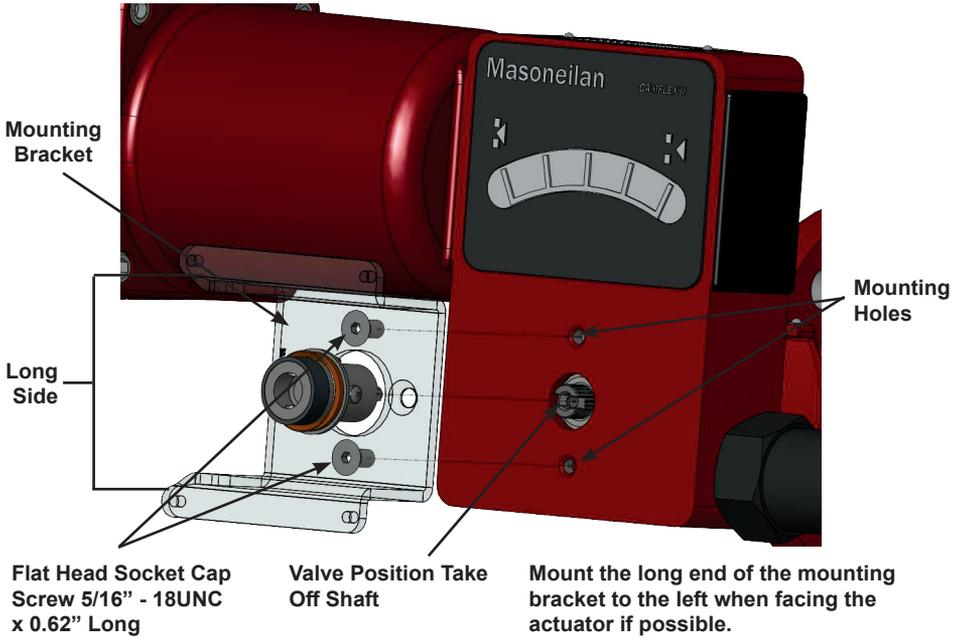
Rotary Mounting Bracket to Valve Actuator
